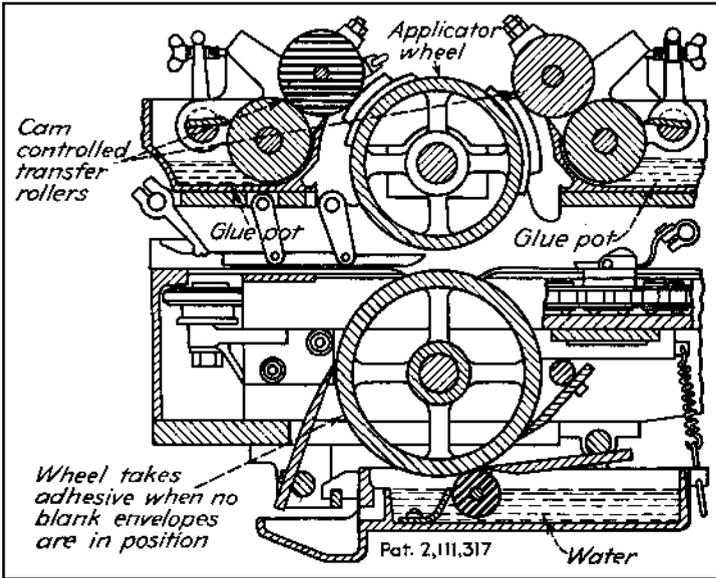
Cam controlled transfer rollers supply applicator wheel pads with two kinds of adhesive.
